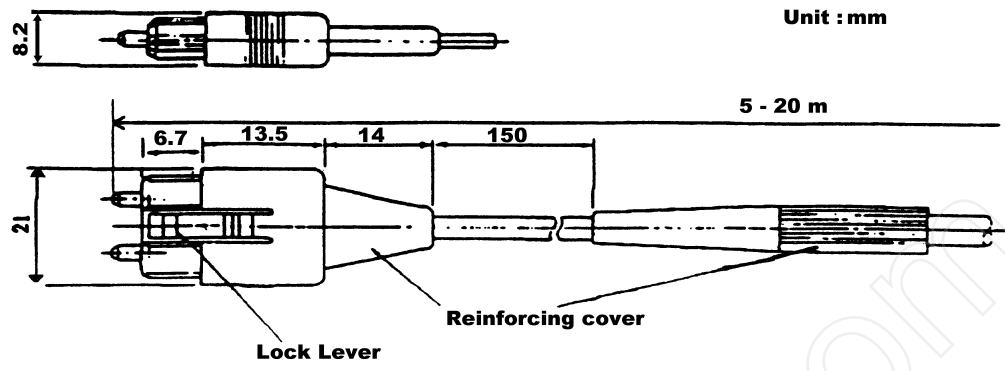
3. Fiber optic cable dimensions (Old Style)
